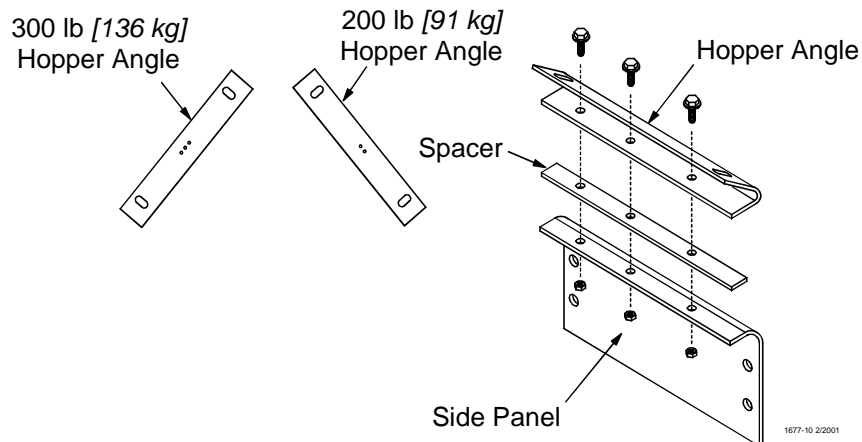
Assembling the Shut-Off Gate Frame Side Panel
